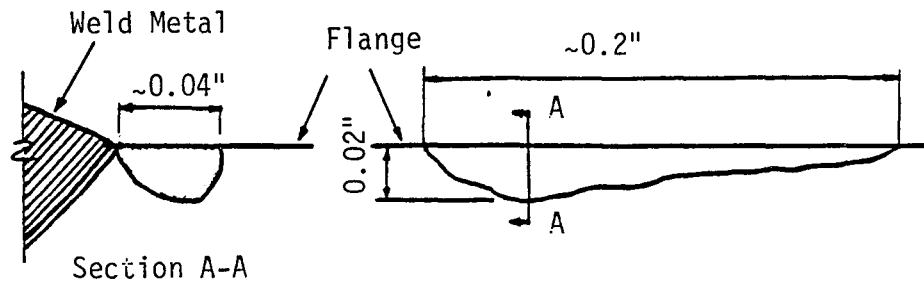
Typical Surface Imperfection at Weld Toe
